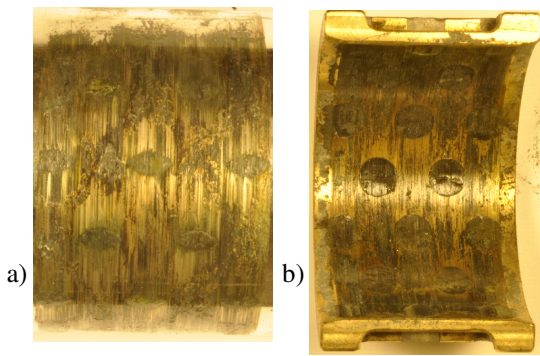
Photographs of tested Oiles JM7.4 a) shaft, and b) bearing.
